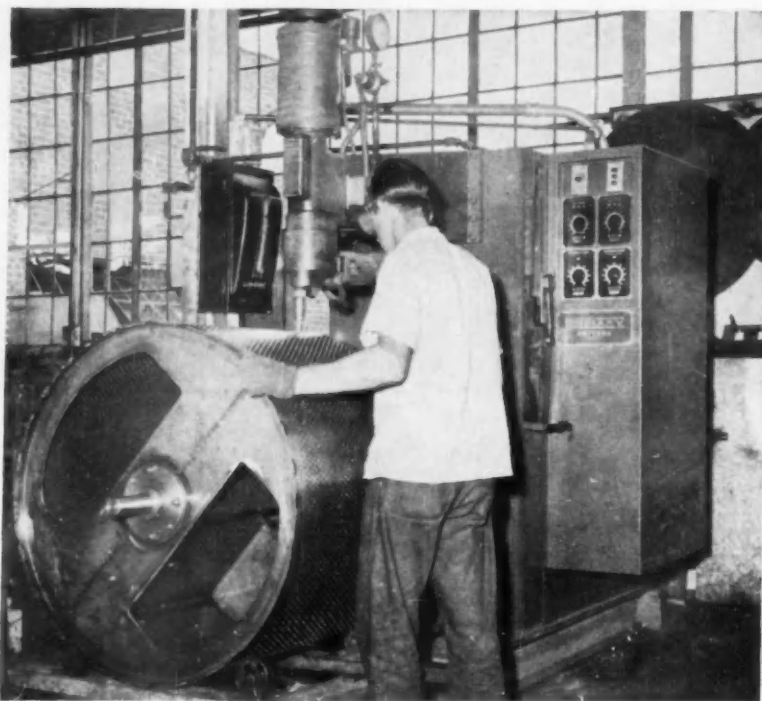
Joining 12 gauge cold rolled, perforated steel cylinder wrapper to housing. Welding is accomplished at flanged edge of head. The wrapper is formed in two semi-circles. The ends of the semi-circles butt against projecting edge of two partitions. This joint is fused with an arc welding torch.
